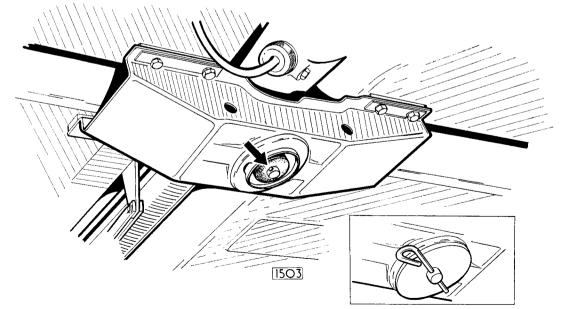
The hole at the bottom of the spring retainer stem is for assembly purposes only. The inset shows the large washer and rod in position prior to removal of the rear mounting.
